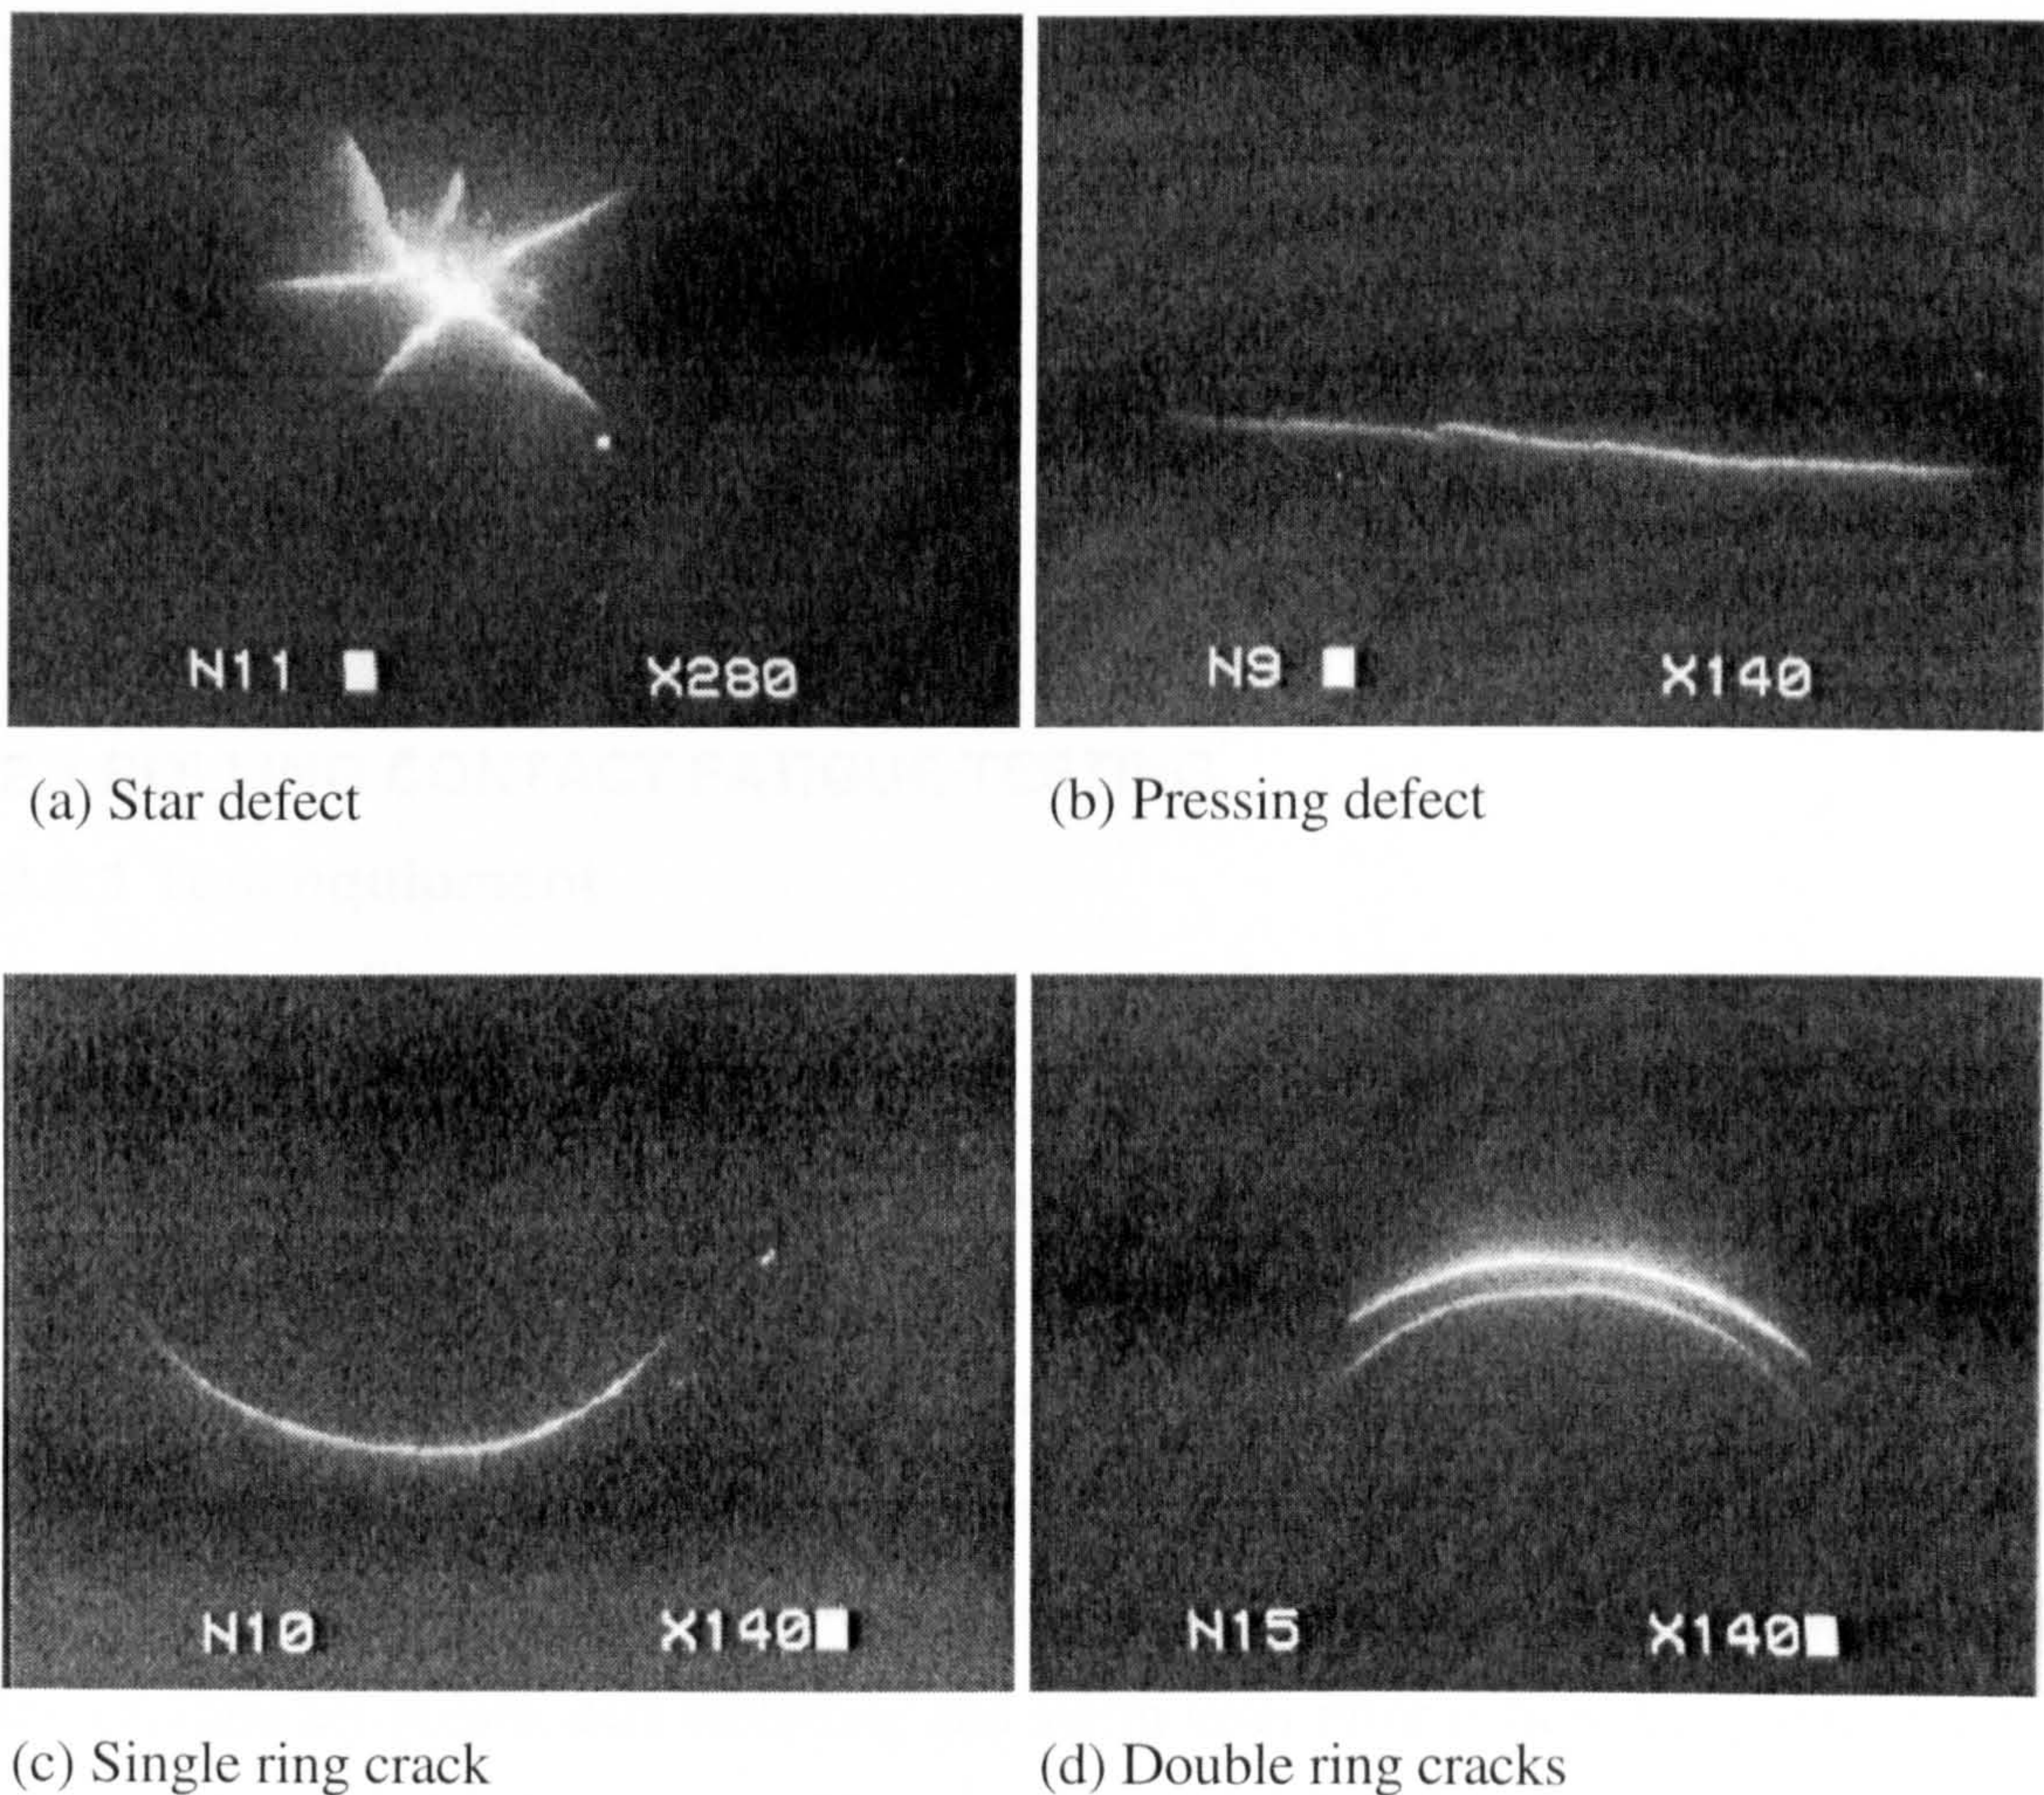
Typical surface defects found on ceramic ball surfaces.
